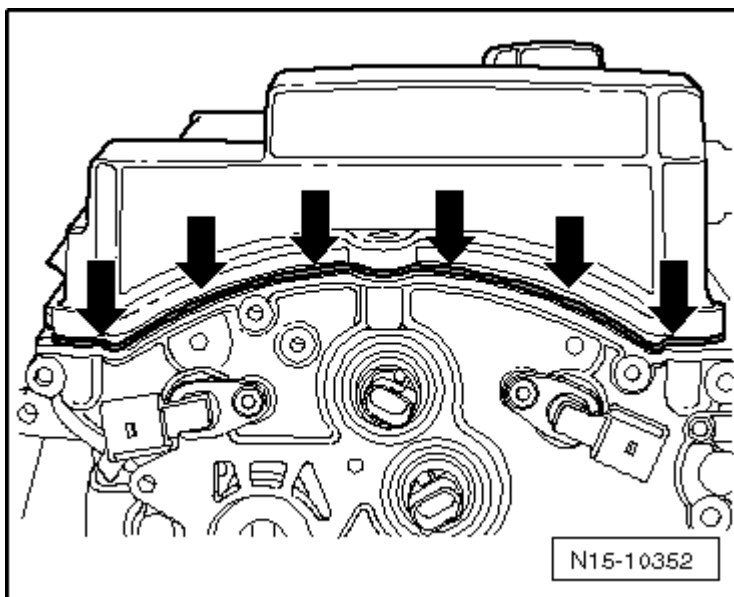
Ensuring Cylinder Head Cover Seal Is Seated Correctly
